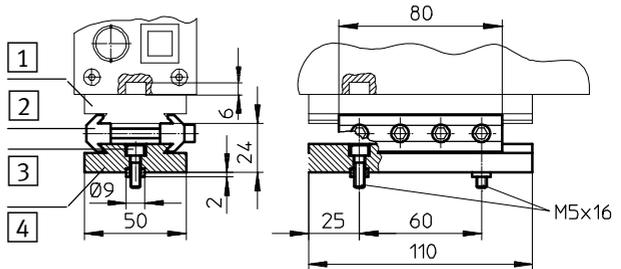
/2: Mounting the Checkbox with connecting kit HMSV-12
